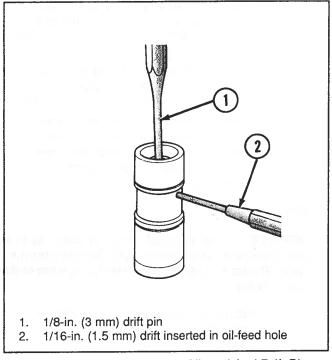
Oil-Feed Holes Aligned And Drift Pin Installed
